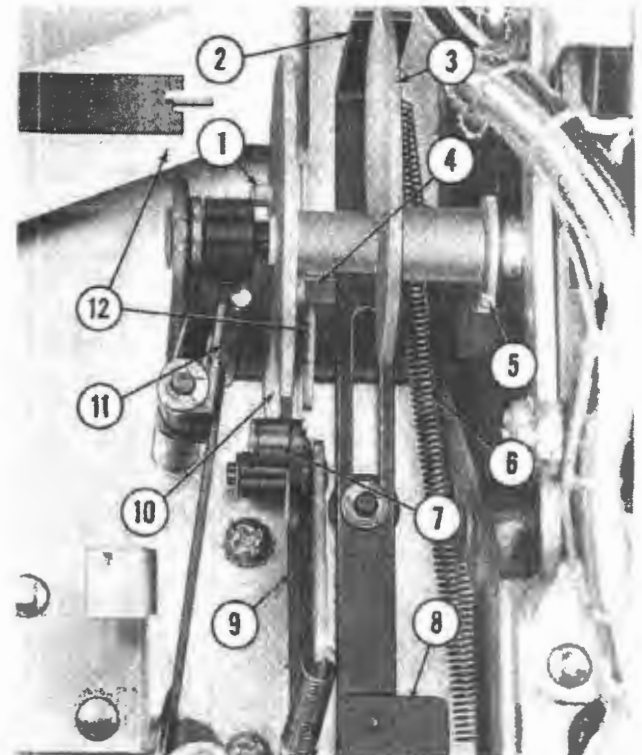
FUNCTIONS, CAM AND PIN ASSEMBLY
